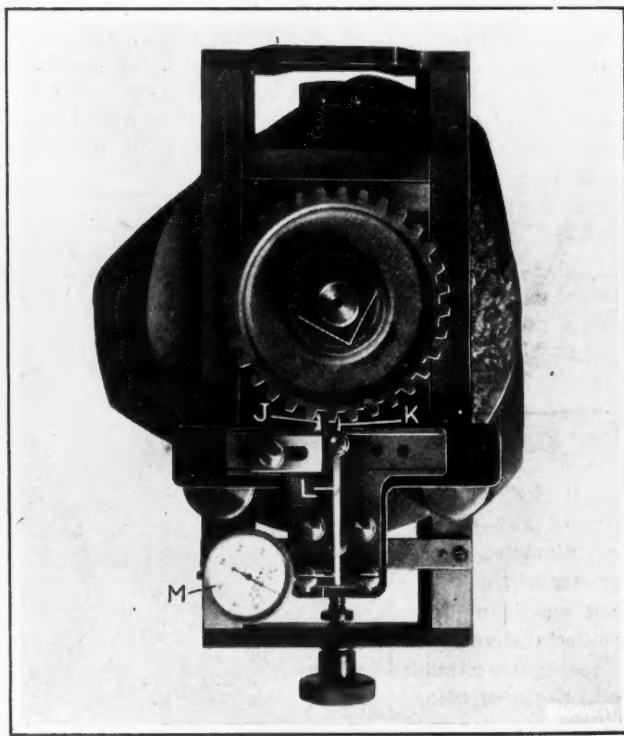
Determining Accuracy of Spacing of Gear Teeth
